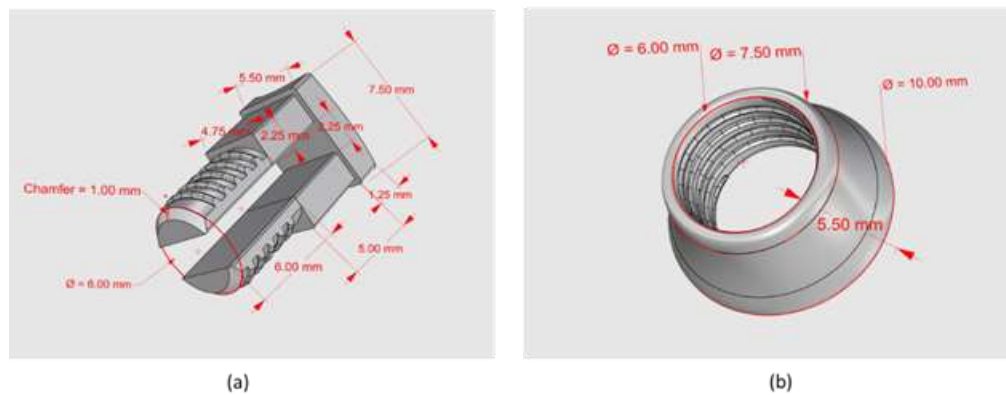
Design and dimensions of the Screw Peg and Cap. (a) Screw Peg. (b) Screw Cap.
